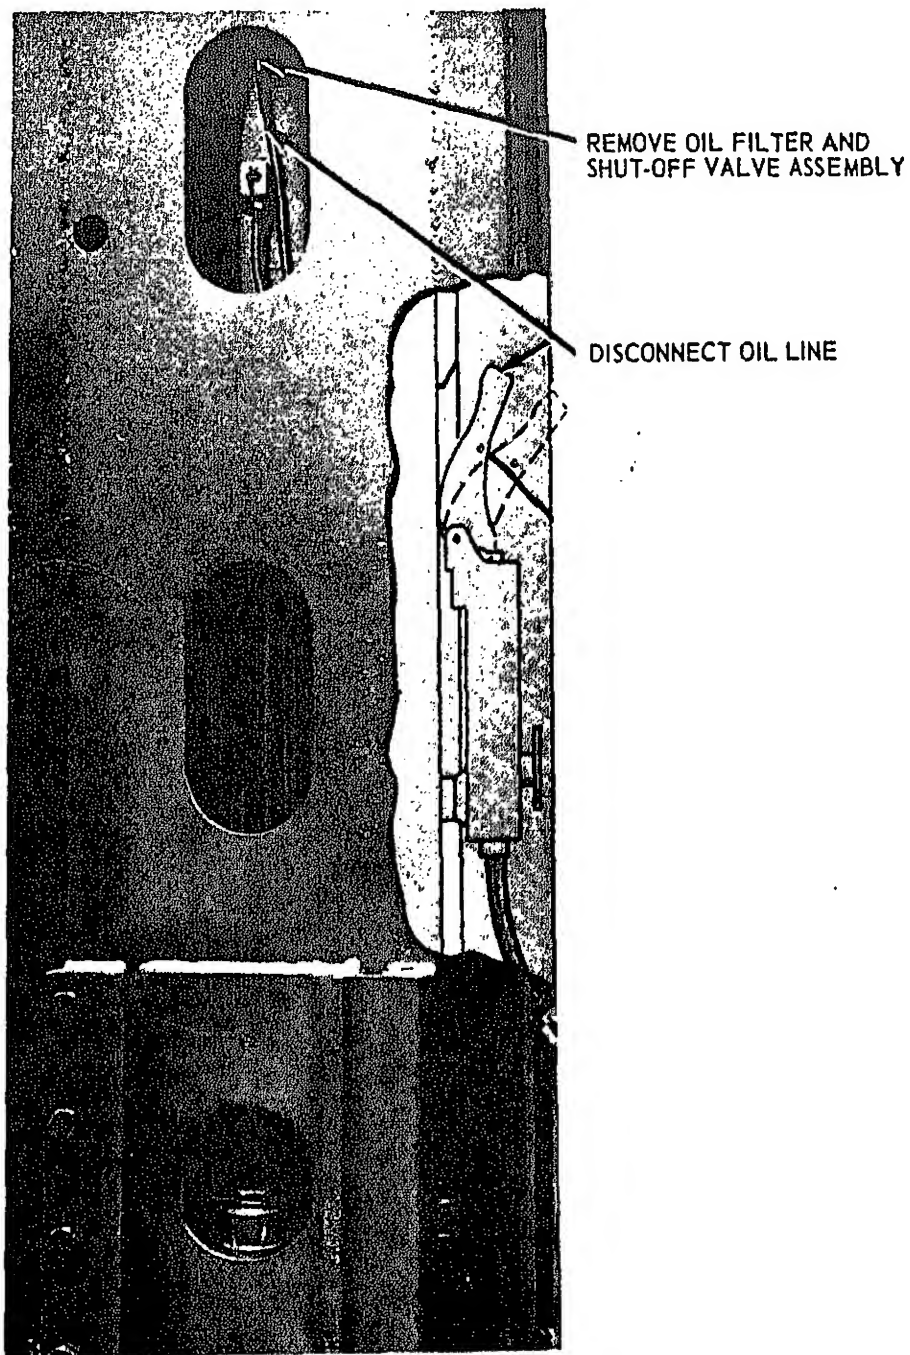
Fuel filter and shutoff valve assembly, removal and installation.
